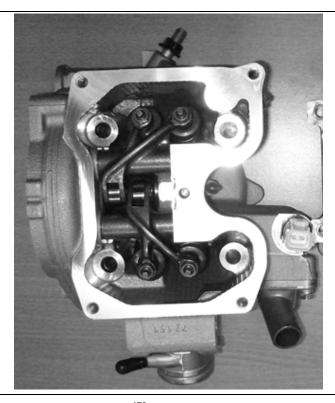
Cylinder Head Assembly - YZF125¹⁷⁶
